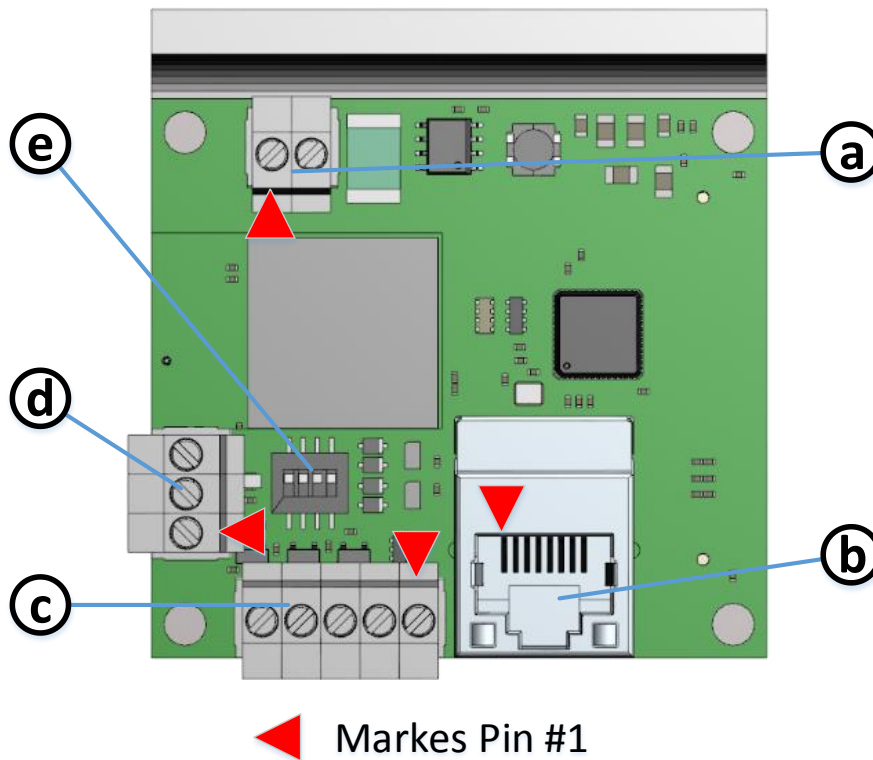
Sentis-ToF-M100 connectors and interfaces
